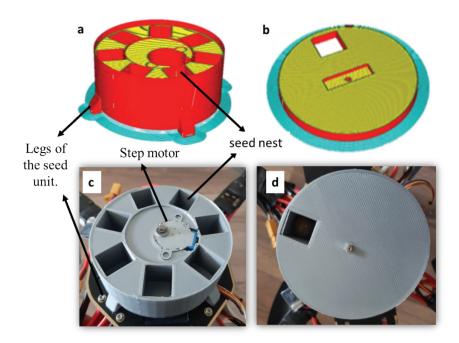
(a) Side and (b) top view of simulated seed unit, (c) side and (d) top view of manufactured seed unit.
